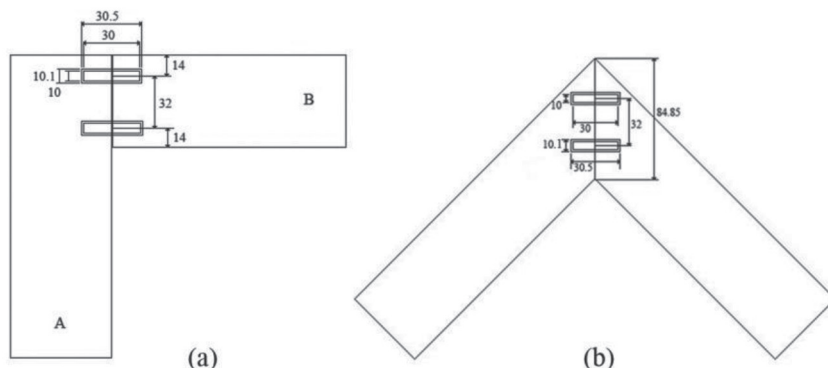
Dowel position and its dimensions (mm) in (a) butted joint and (b) mitered joint.
